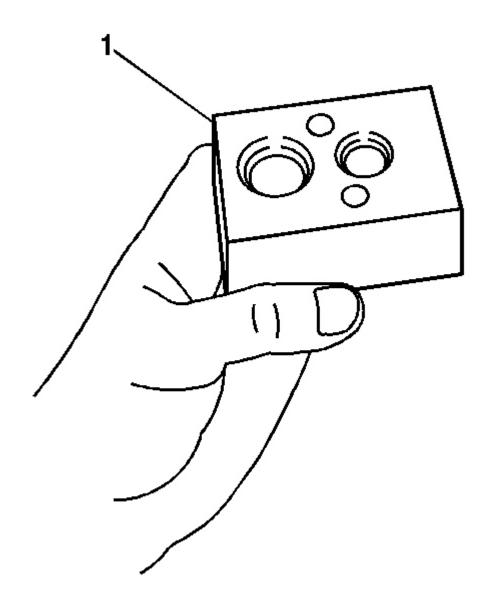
Removing/Installing Evaporator Block Courtesy of GENERAL MOTORS CORP.
